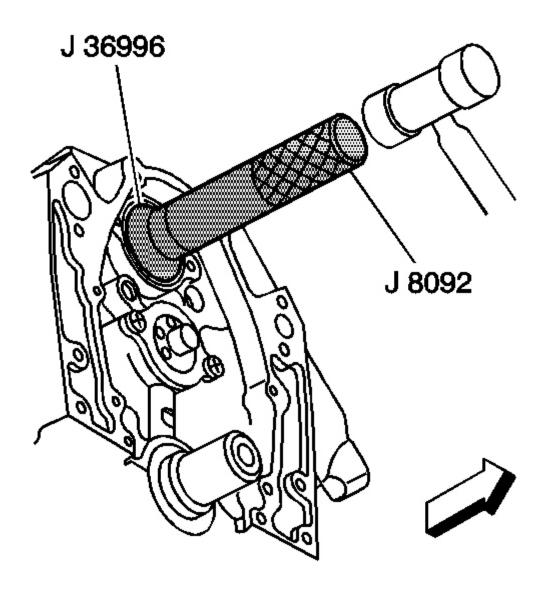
Balance Shaft Courtesy of GENERAL MOTORS CORP.
